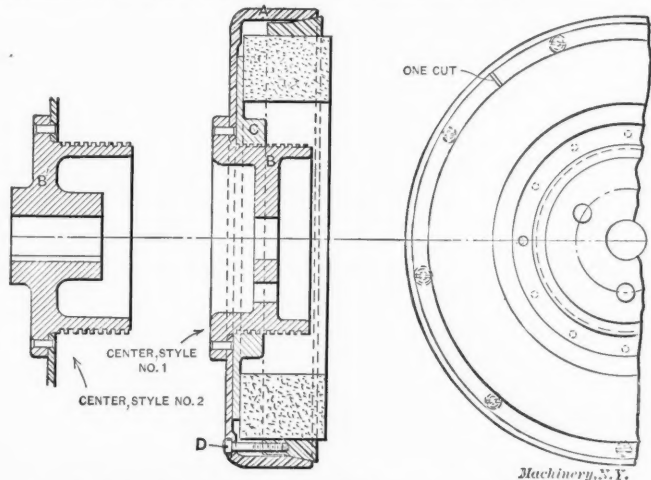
Sectional View of the Graham Pressed Steel Grinding Chuck
